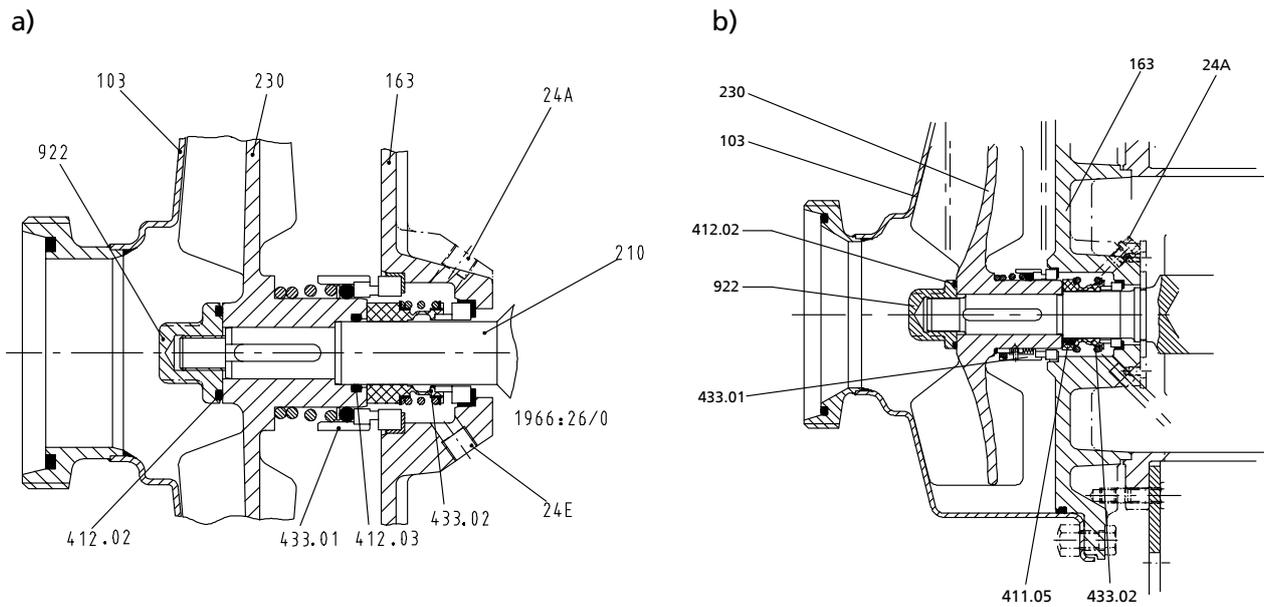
Double mechanical seal a) with O-ring (size group I) b) with V-ring (size group II)
